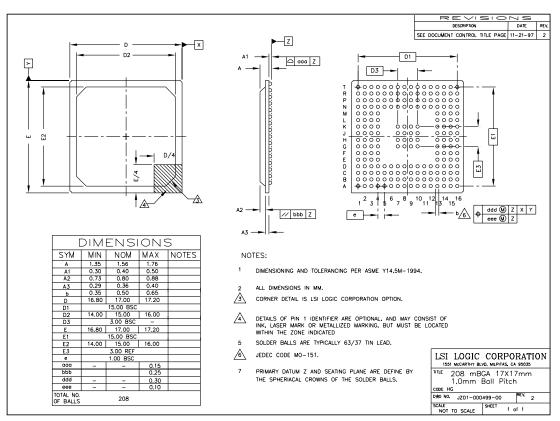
208 mini-BGA (HG) Mechanical Drawing
